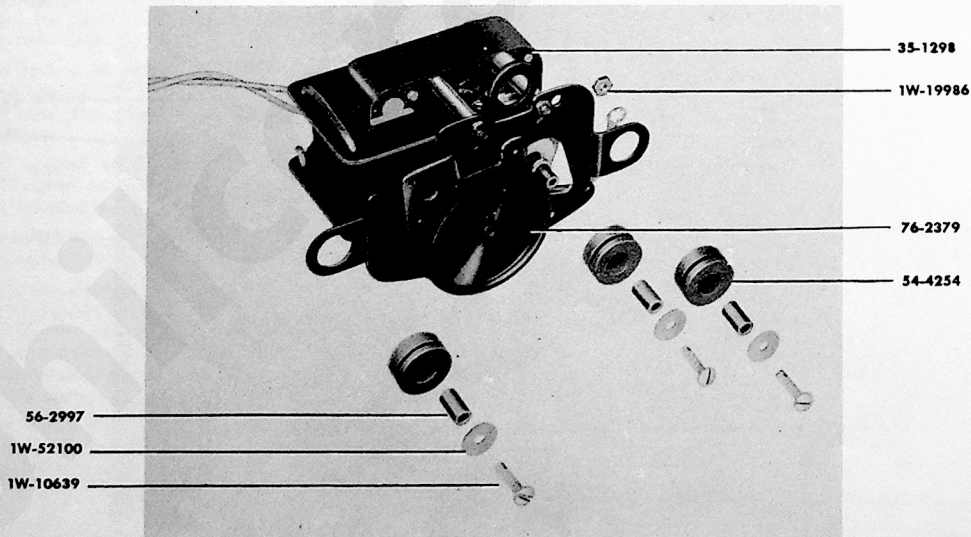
MOTOR AND IDLER-WHEEL ASSEMBLY,
